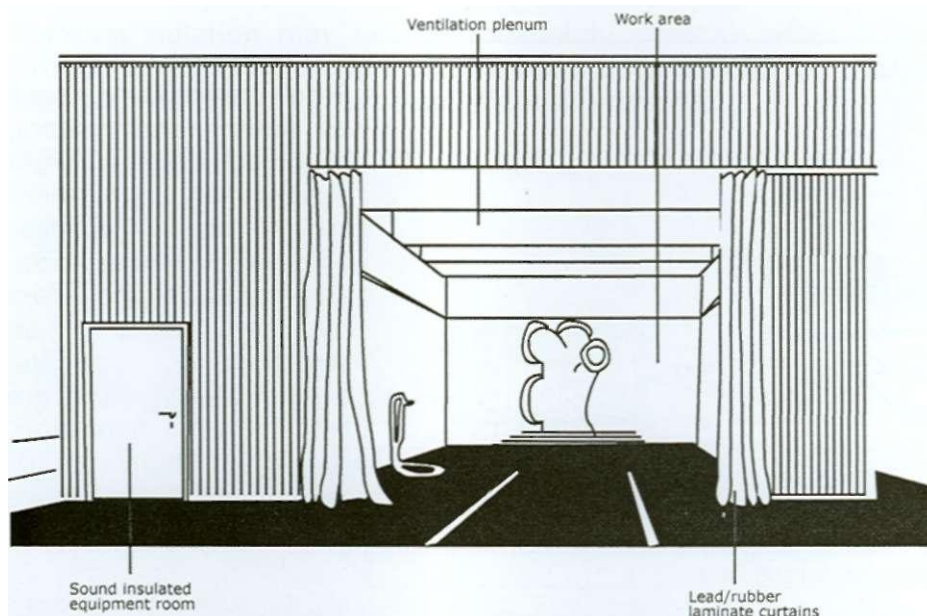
Sand blasting machine, housed in a sound insulated machine room, with a partial enclosure erected around the work area.
